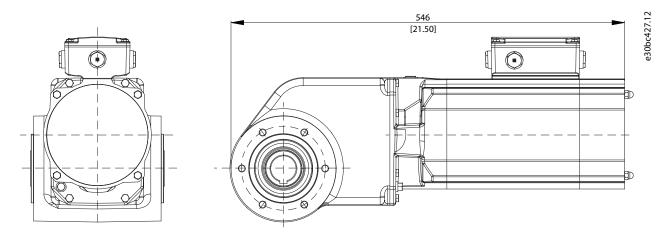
Dimensions of VLT® OneGearDrive® with Mechanical Brake Option
